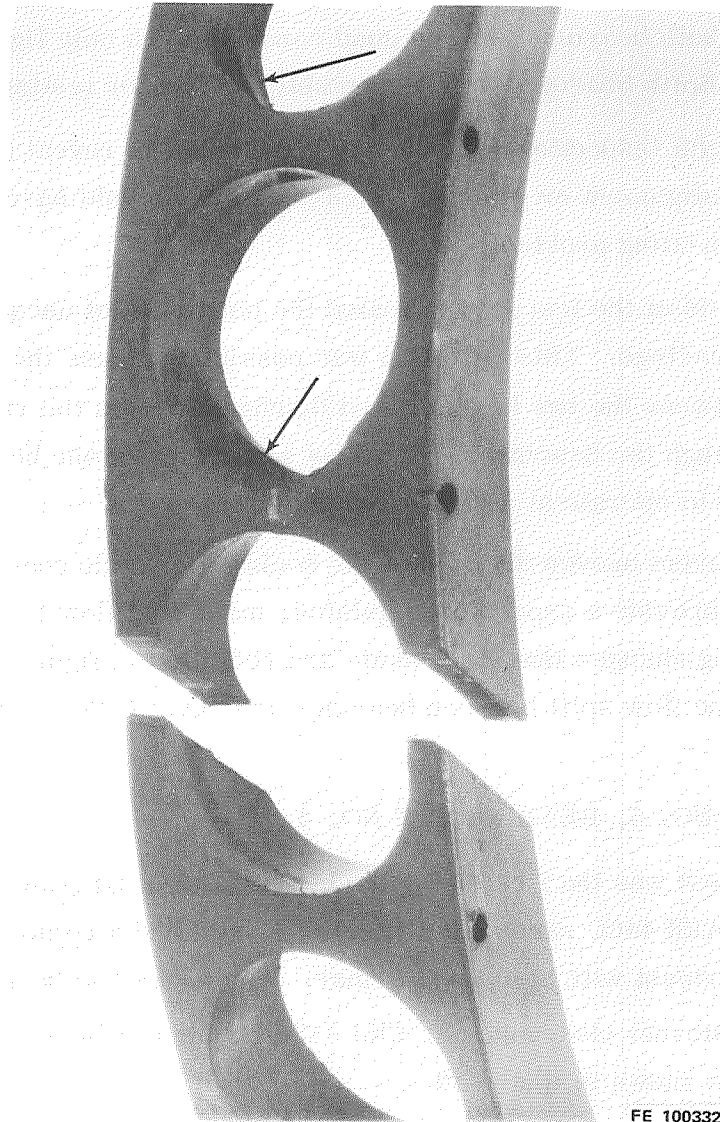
Rear Ball Bearing, S/N 249 Cage Showing Heavy Ball Pocket Wear Patterns During Test No. 3
